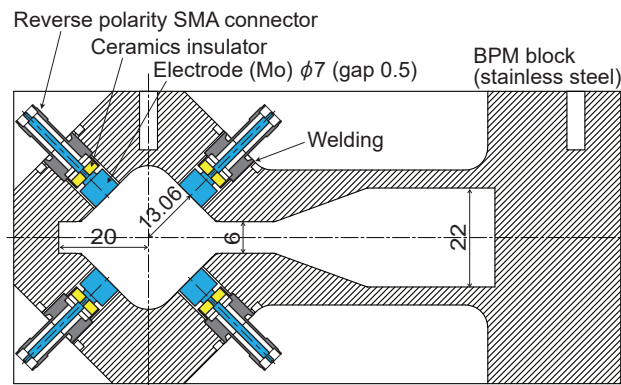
Schematic cross-sectional view of the BPM head. The unit of dimensions is mm.
